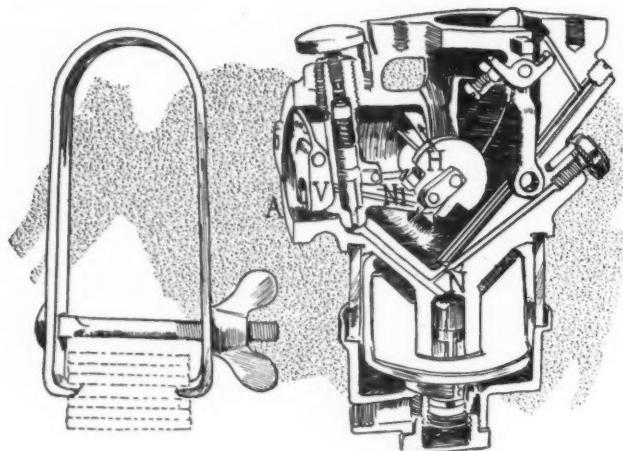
Security spring spreader for separating spring leaves when lubricating. At the right, the Kennedy springless carburetor which has gravity flap valves for air inlet. All the air enters at A, guarded by flap valve V. The carburetor has two nozzles, a fixed one, N, and a movable one, N₁, which is interconnected with a special air valve H
